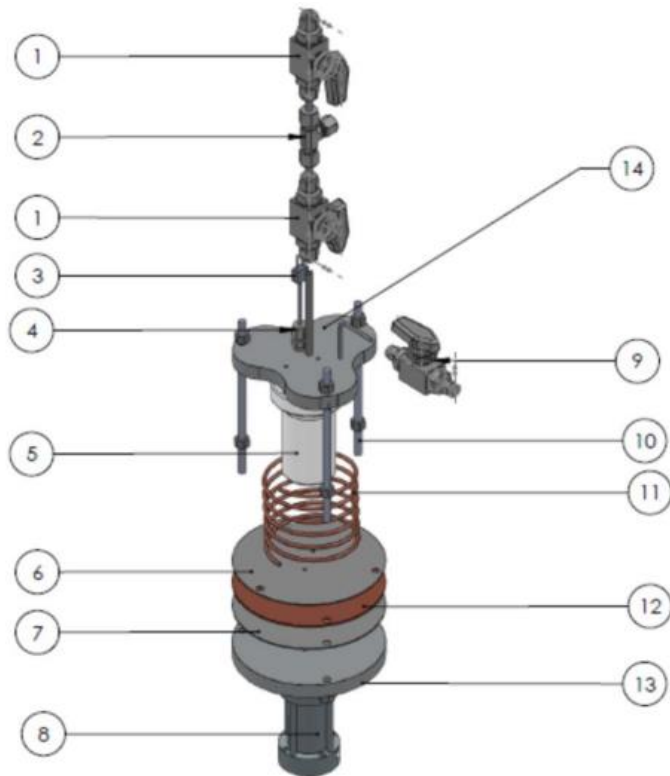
Diagram of the Jiggle Bed Reactor (1) on/off feed valves; (2) Inlet of carrier gas; (3) Thermocouple; (4) Inlet of feed and carrier gas; (5) Ceramic crucible with insulation; (6) Insulation disk; (7) Insulation disk; (8) Linear pneumatic actuator; (9) Outlet gas valve; (10) Stainless steel support rods; (11) Copper coil; (12) Copper disk; (13) Aluminum disk mounted on the actuator; and (14) Stainless steel scalloped disk.
